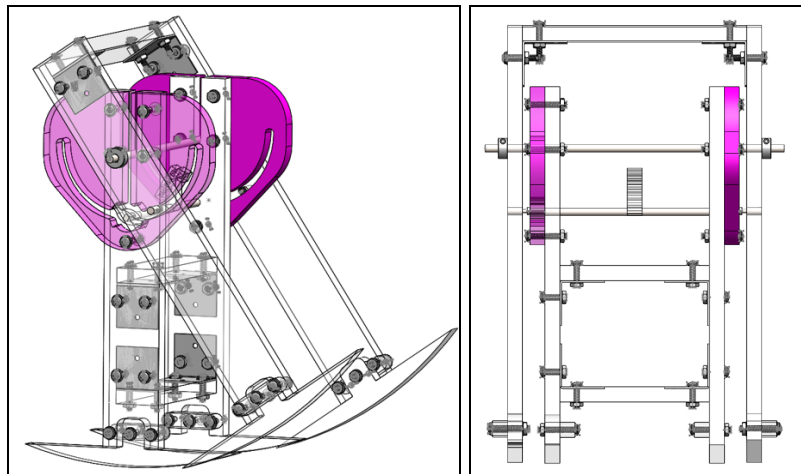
(Left) The outer legs in a swinging forward position. (Right) A frontal view of our MK II prototype.
